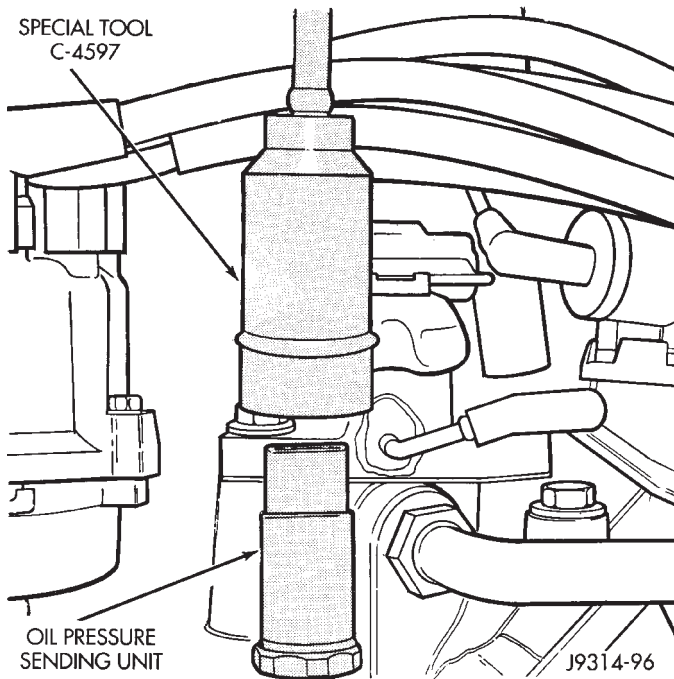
Oil Pressure Sending Unit—Removal/Installation
